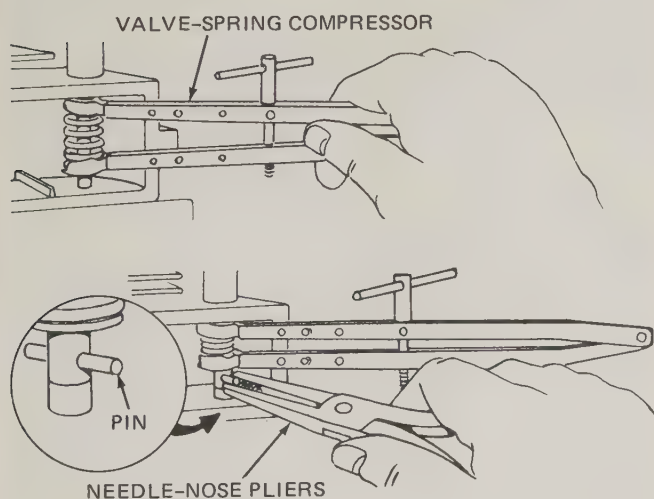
Removing valve spring on engine using pin retainer. (Briggs & Stratton Corporation)
